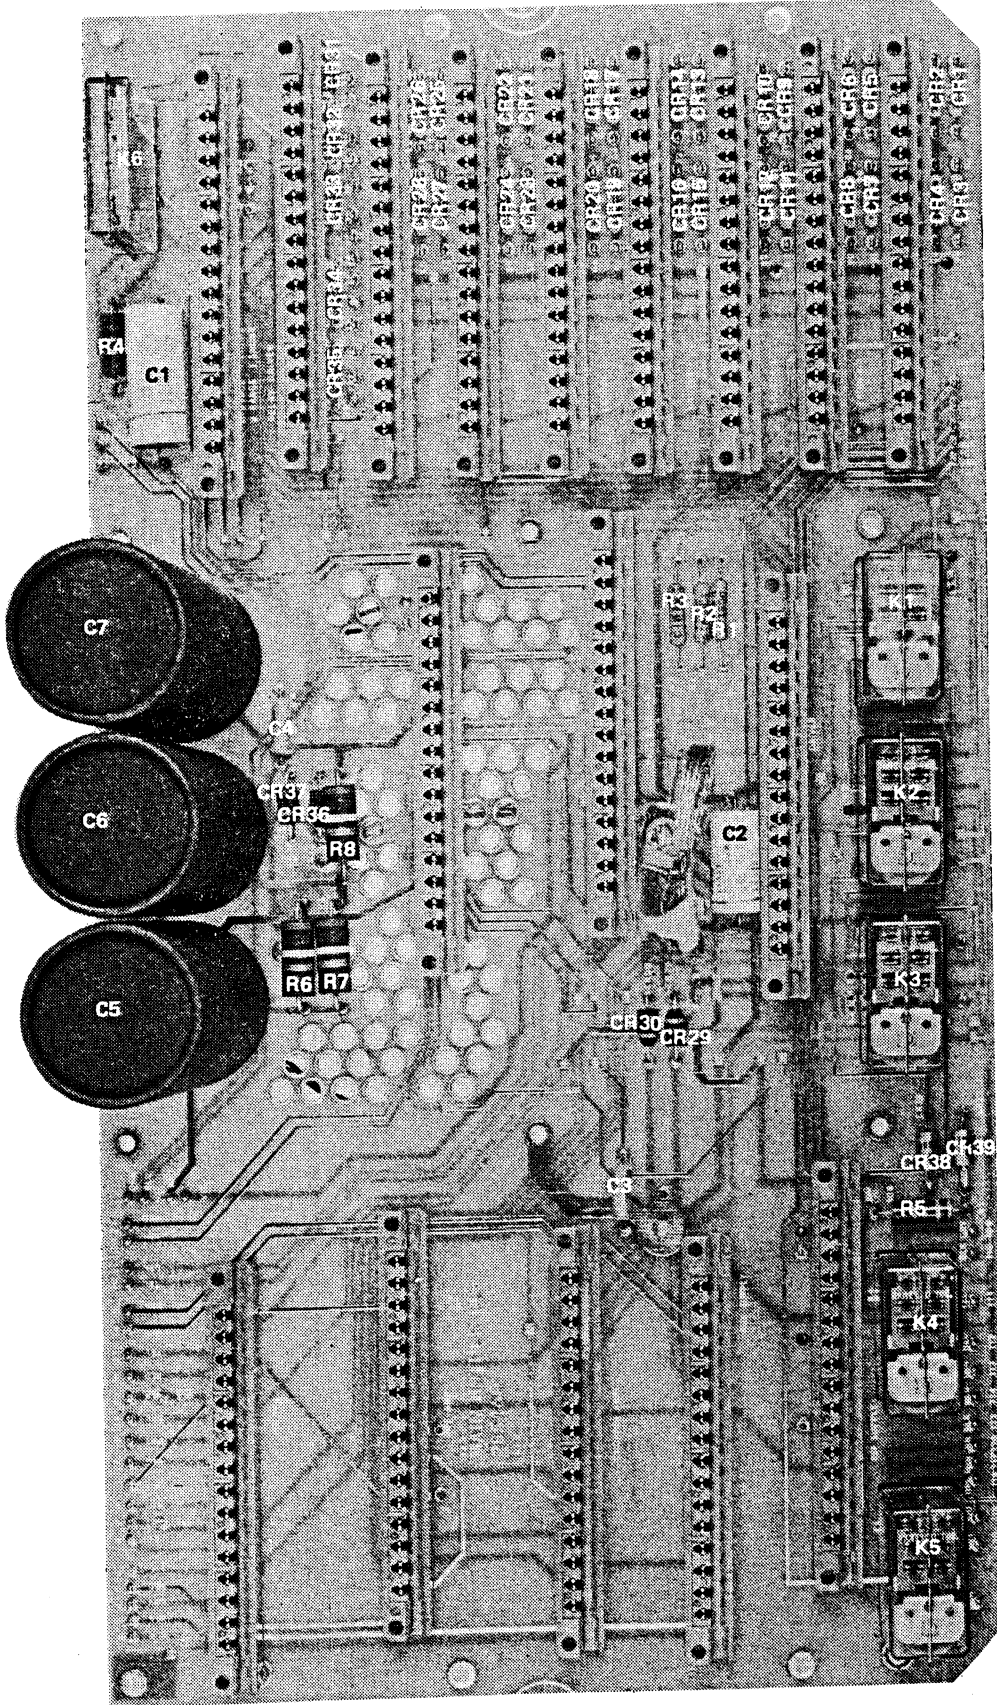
MAIN MOTHER BOARD ASSEMBLY
